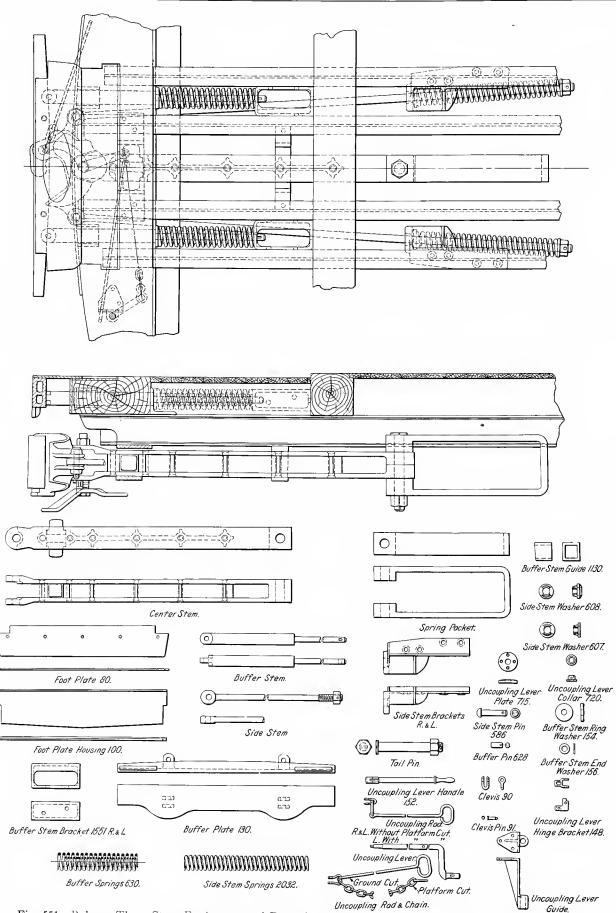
Buhoup Three-Stem Equipment and Parts for Passenger Train Car Platforms. McConway & Torley Company.
